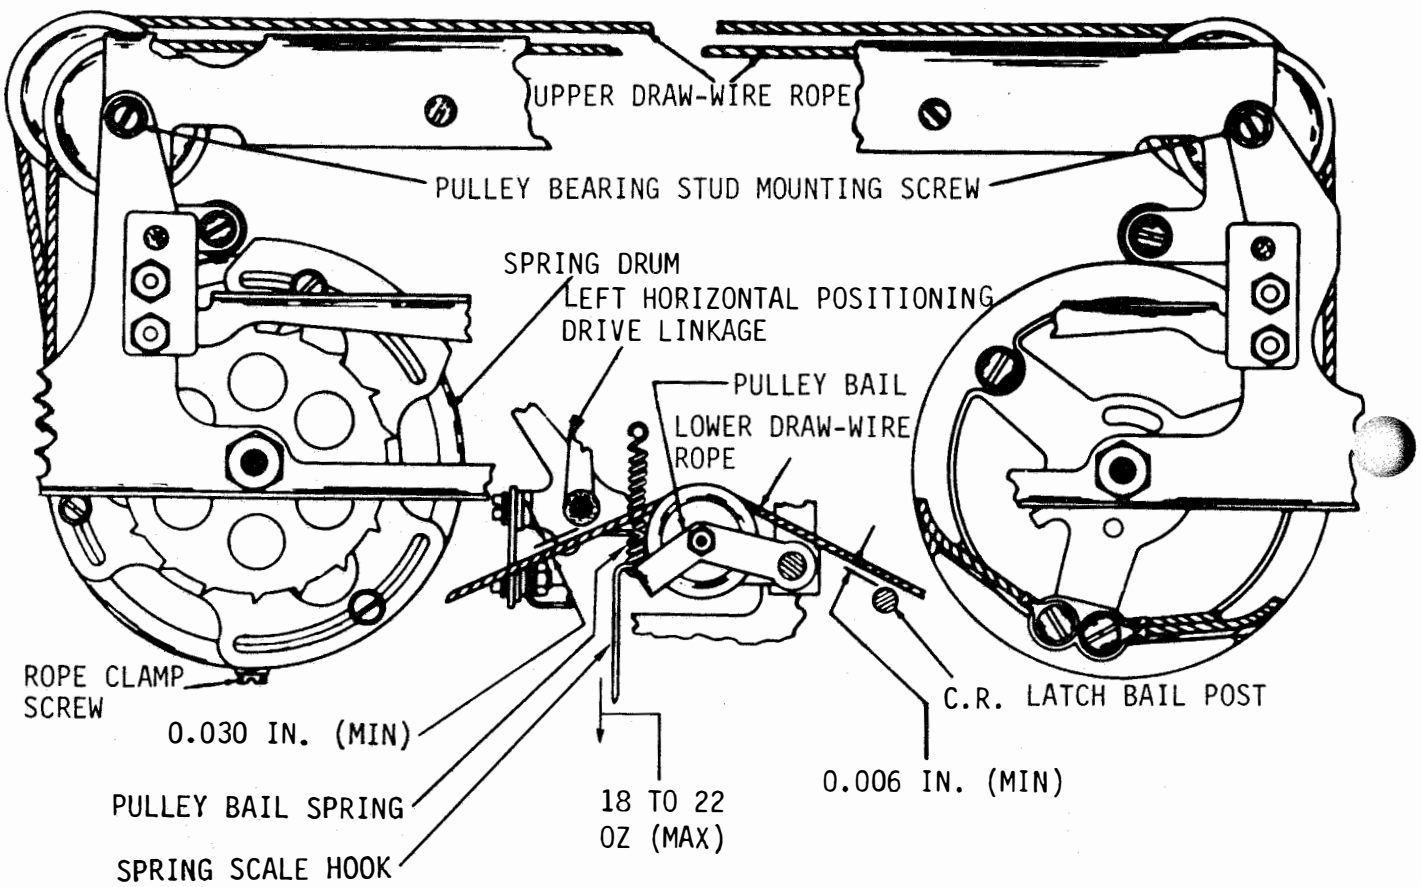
Lower Draw-Wire Pulley Bail Spring and Carriage Draw-Wire Rope, Front View
